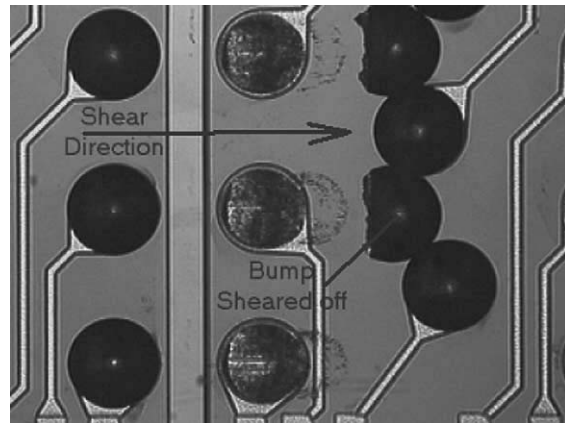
Good shear fracture surface through the bulk of solder after PCT.
